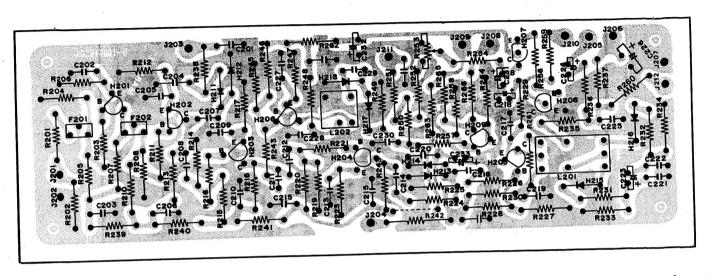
FM Front End and AM Tuner Assembly P100 Component Locations
